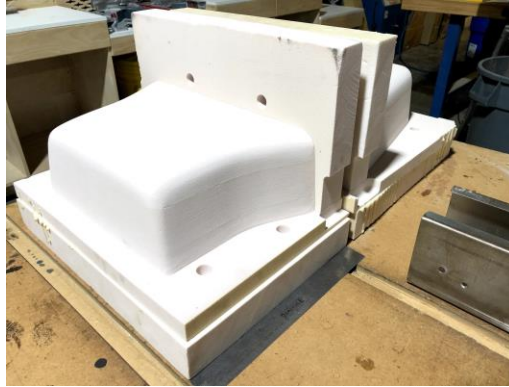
Foam mold quarters with their added vertical flanges. Notice the machined registers in the bottom corner of the flange to align the parts for gluing.
